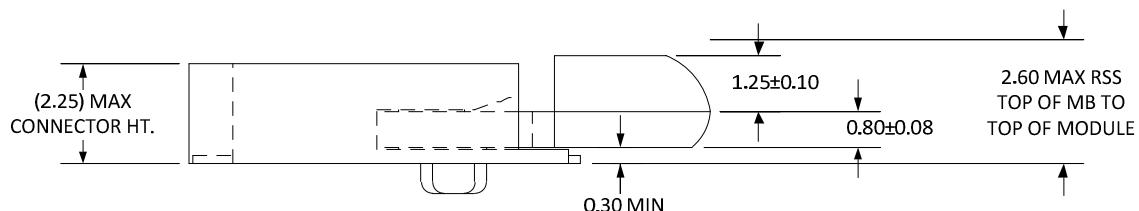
H2.3-S2 - Stack-up Top Mount Single Sided Module for 1.35 Maximum Component Height
